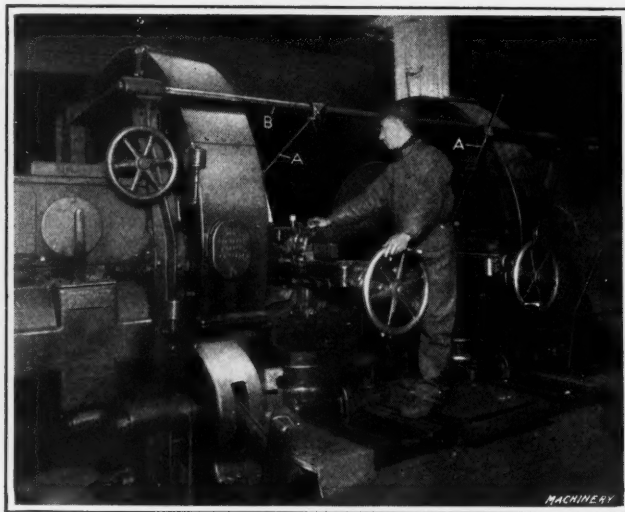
Re-turning the Treads of a Set of Engine Wheels. Gages A test Uniformity of Size
